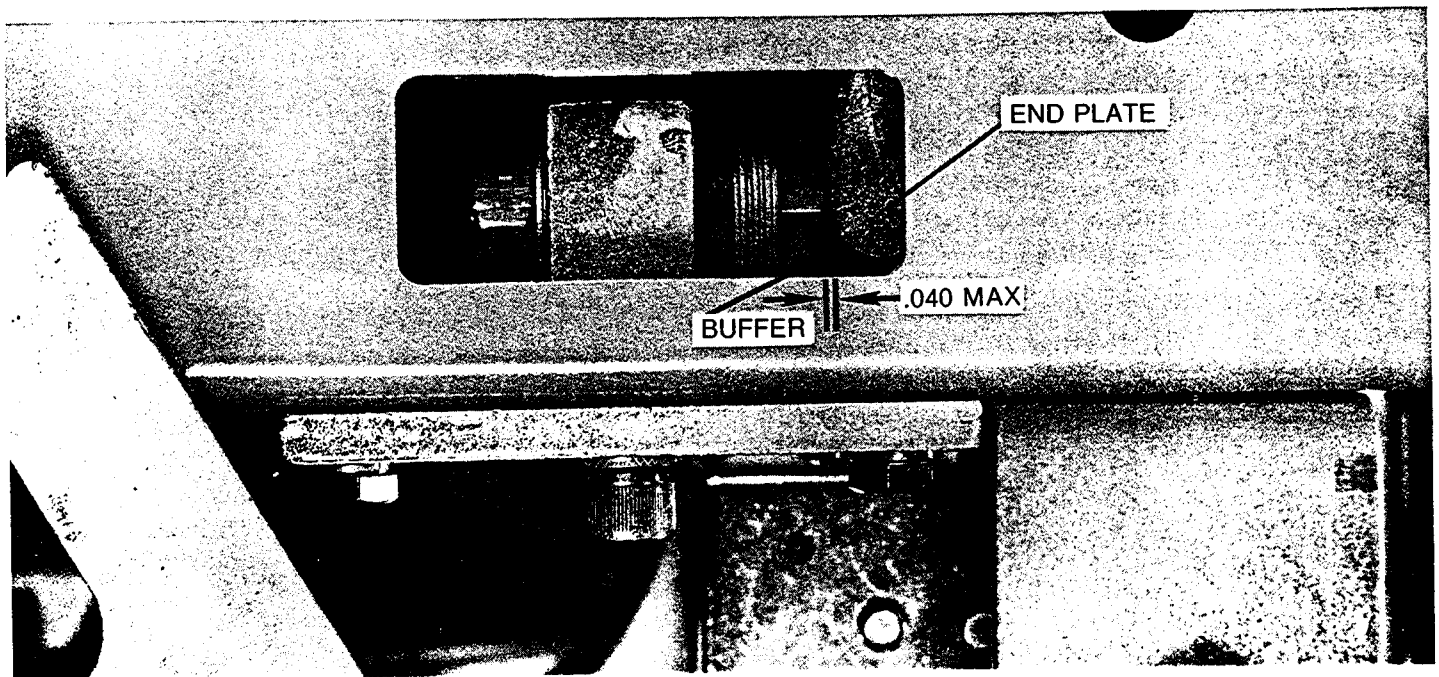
BUFFER/END PLATE RELATIONSHIP—BREAKER OPEN
